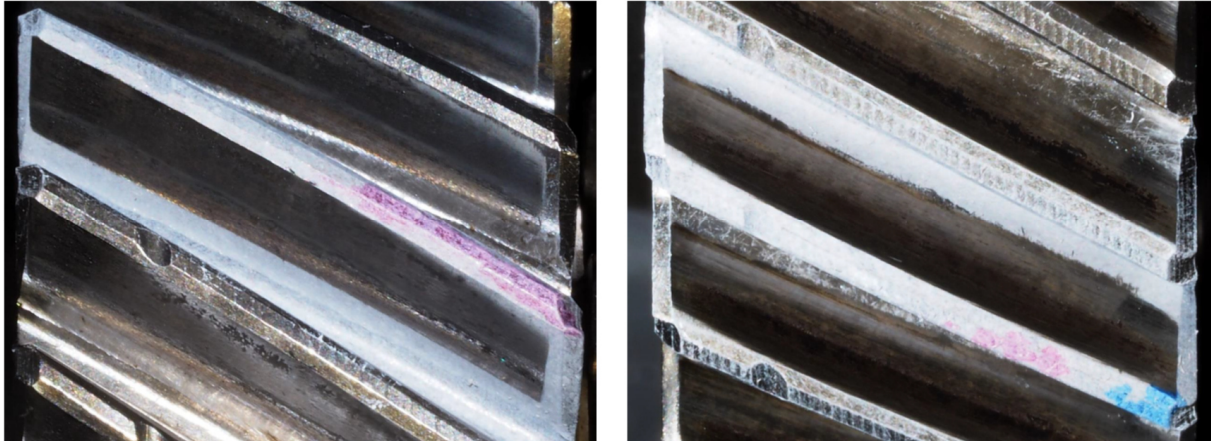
Result of the PM HIP:ed gears summative contact pattern test (3rd speed) by nominal test load (torque), gearset 1, gear 1 ($z=32$, left), gear 2 ($z=41$, right)
